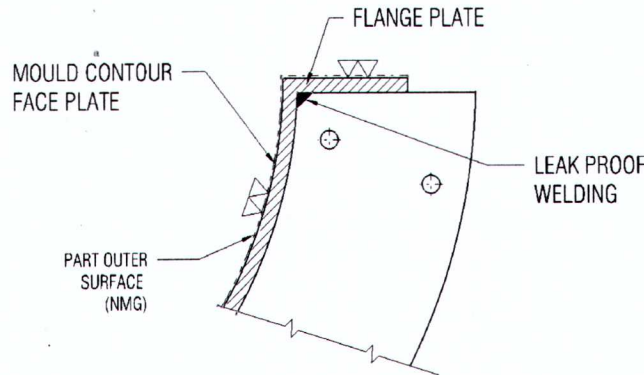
Typical leak proof welds between Faceplate and Flange plate
